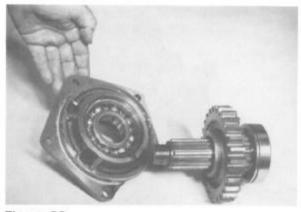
Output shaft, gear and bearing pressed from bearing retainer.
